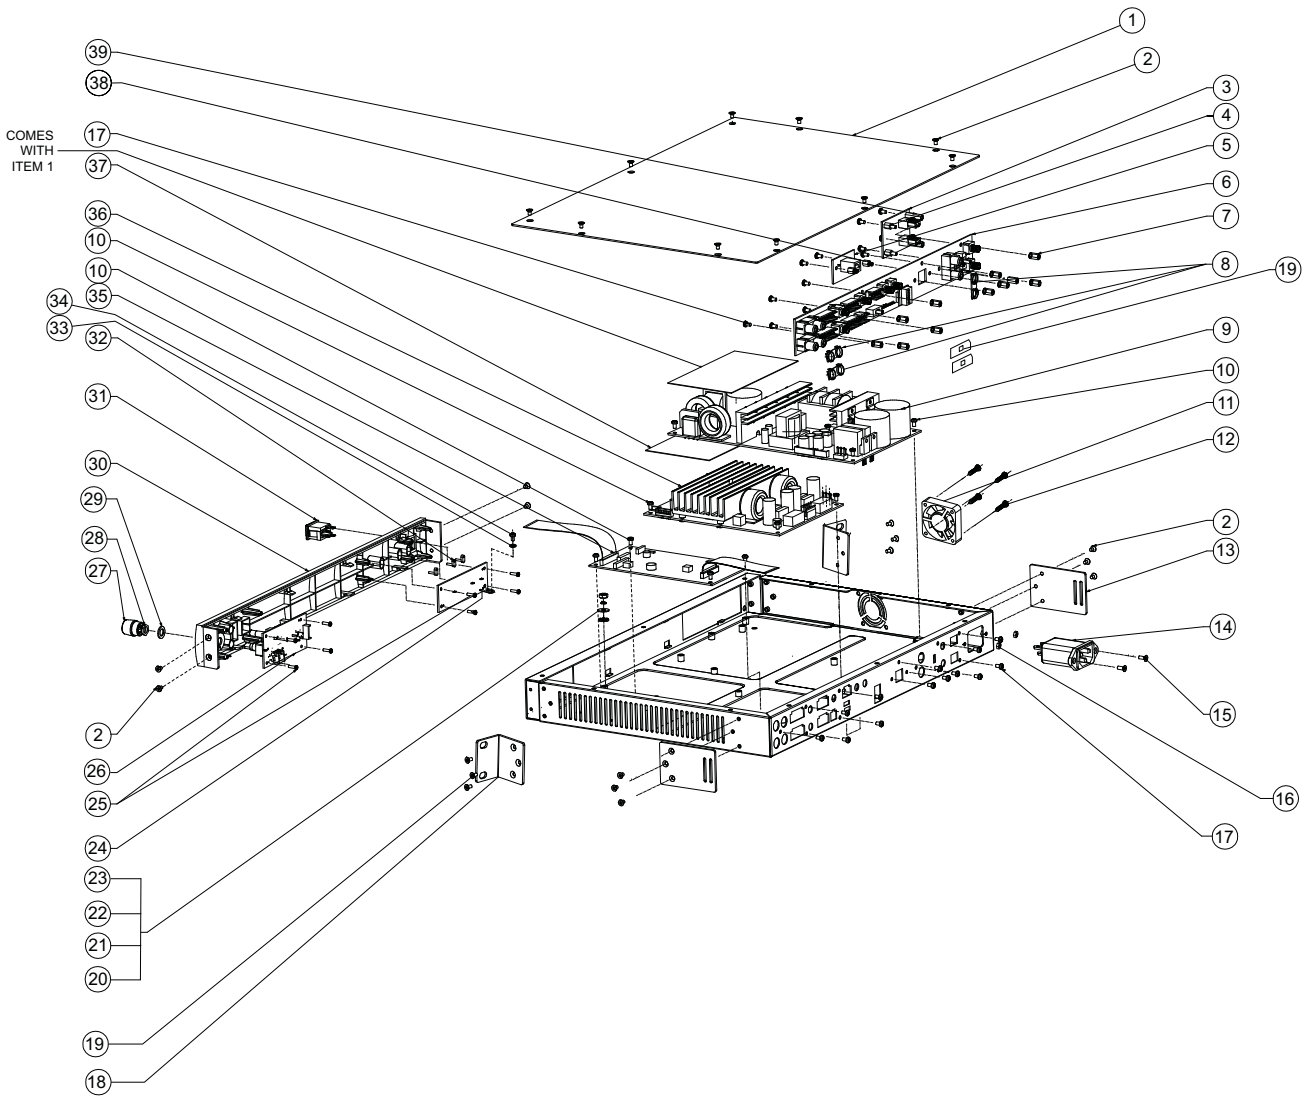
IZA 2120-HZ and IZA 2120-LZ Amplifiers Exploded View
